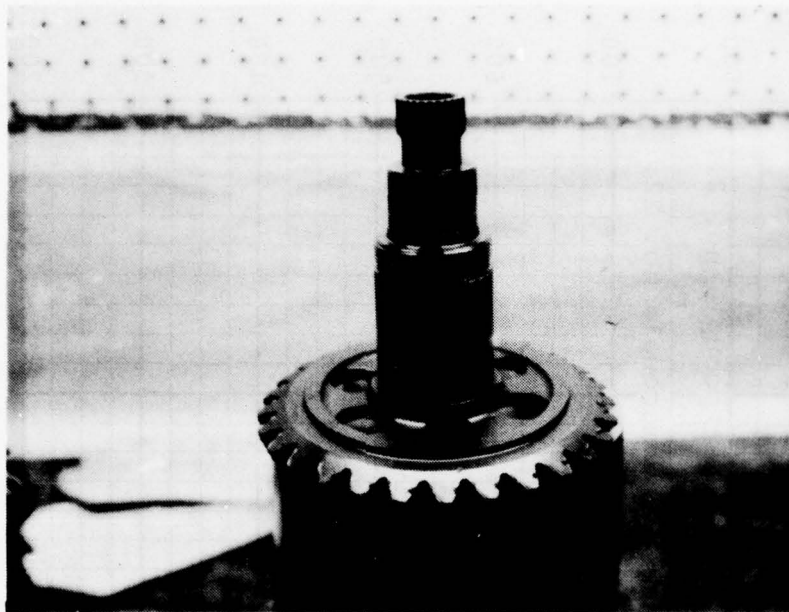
Fan accessory gear after 7-minute loss-of-lube test of transmission number 1.
